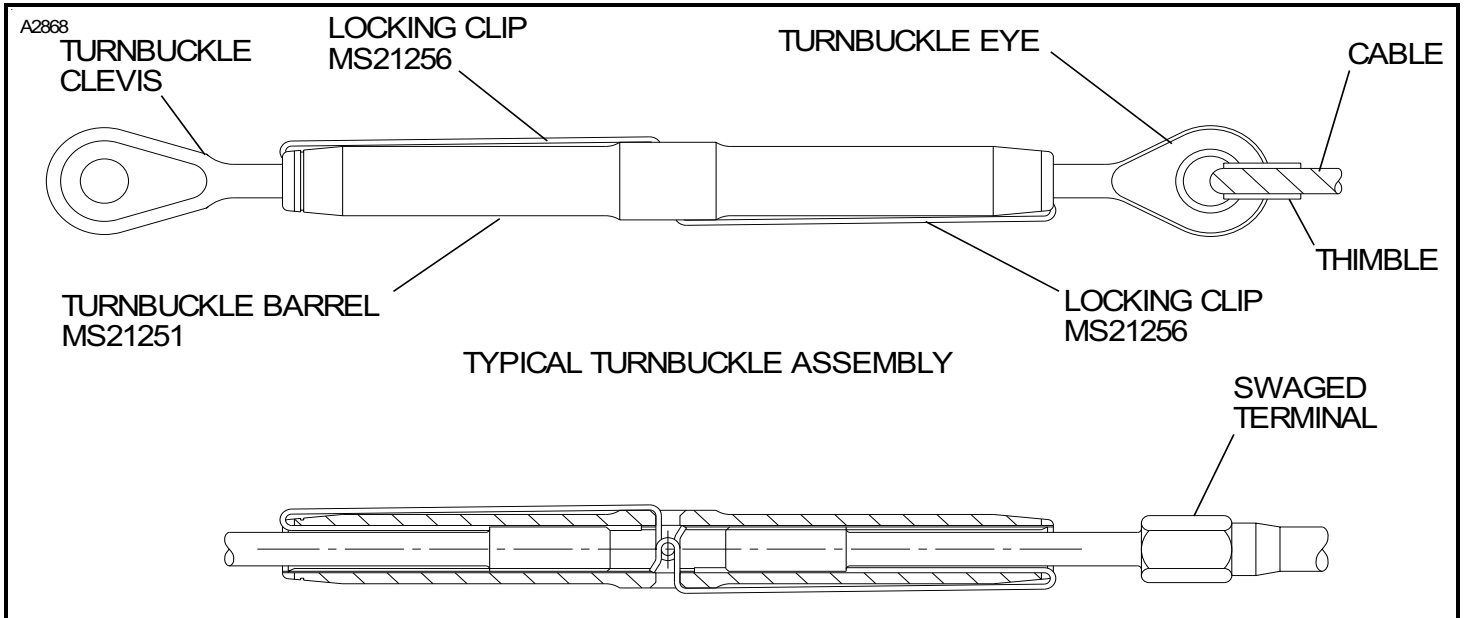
Sheet 2 : Safeying Turnbuckle Assemblies
